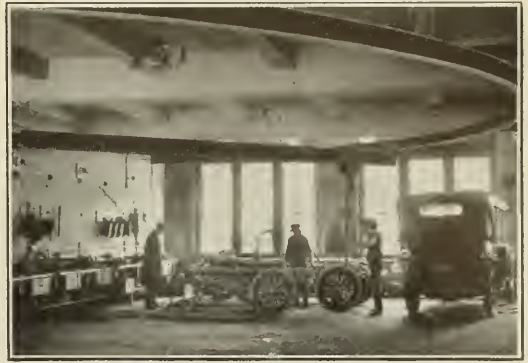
A jib crane must be provided with support for the outboard end of the beam. This is often done by means of tie-rods. In this case the ceiling is too low to permit of this construction, so the outboard end of the beam is furnished with a trolley which runs on a semi-circular rail
